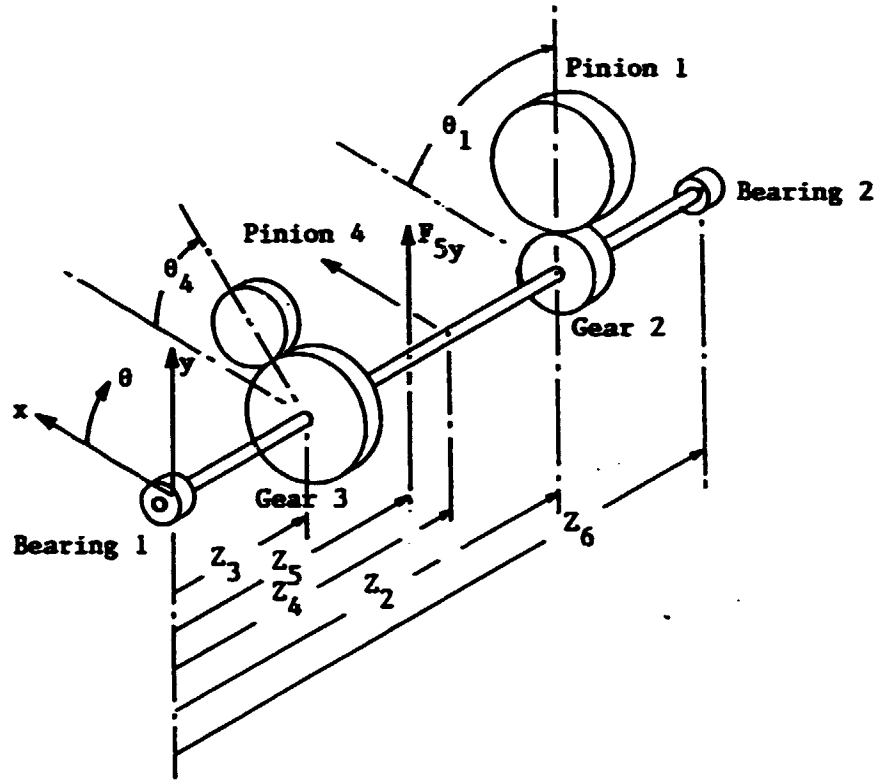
Transmission Gear, Shaft and Bearing Arrangement
